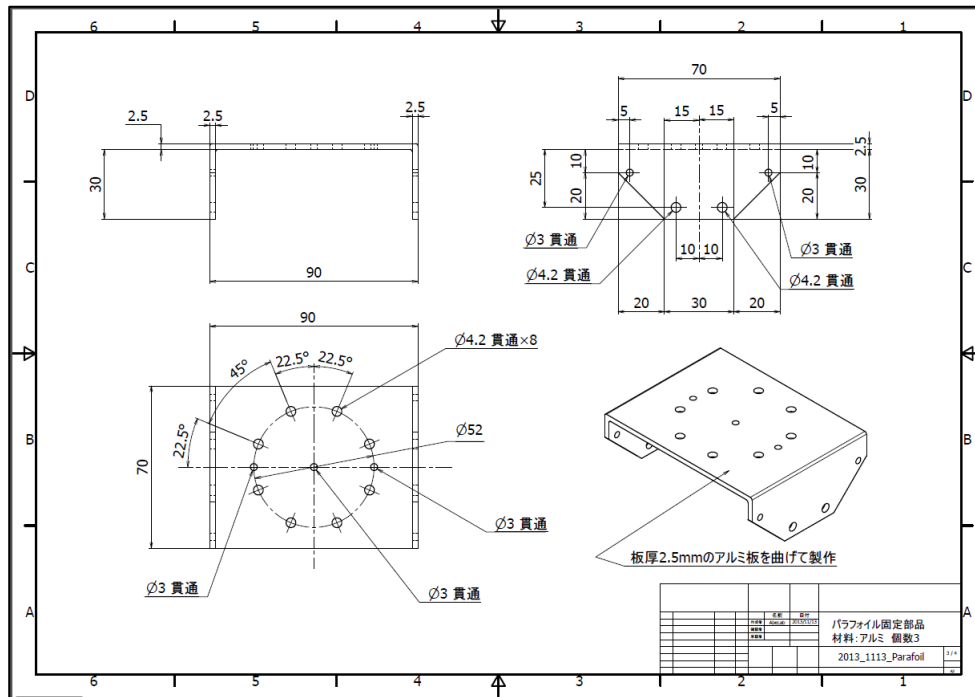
Part drawing 1 of attachment jig for wind tunnel test.
